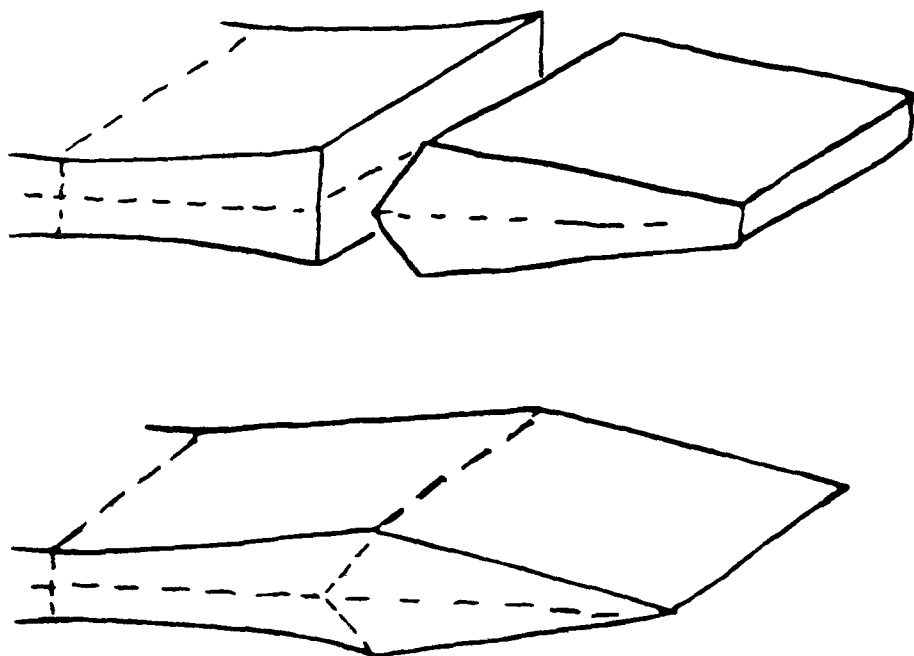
Welding a hardened cutting-edge on a sword (France-Lanord 1949, Fig. 12).
